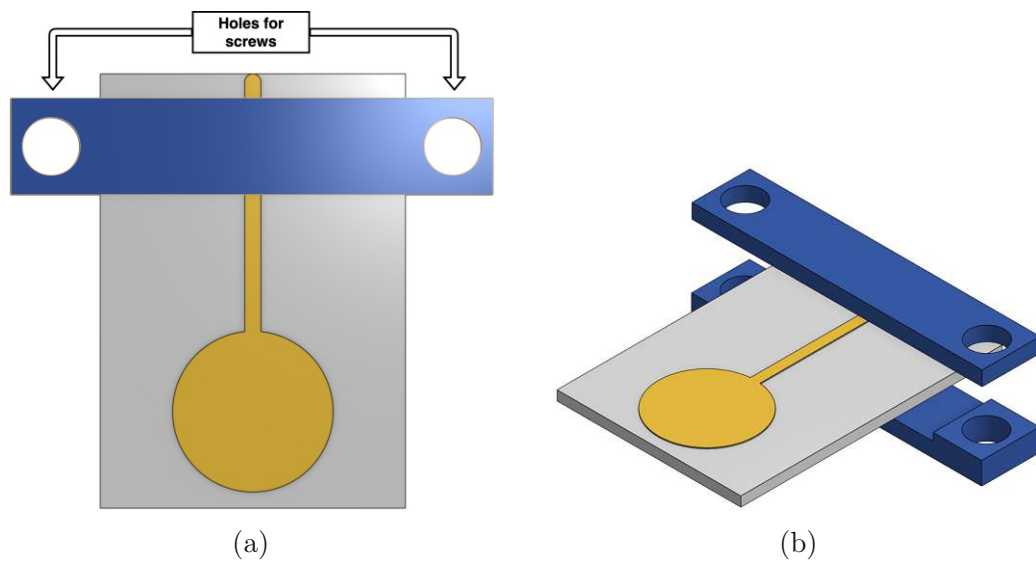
New design of thin film electrode that is evaporated directly on a glass chip with the the clamp for holding and connecting a wire. a) Frontal view of electrode and clamp with the holes for the screws highlighted. b) Exploded isometric view of the clamp and chip design for the thin film electrode.
